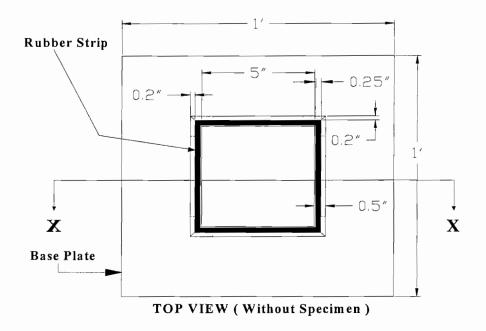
Top View of Specimen Mounting Unit (without Test Specimen)
